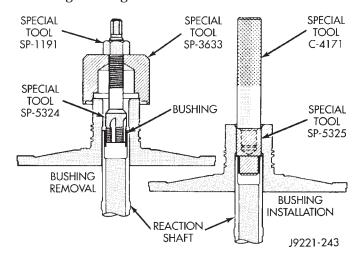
Replacing Reaction Shaft Support Bushing ASSEMBLY
